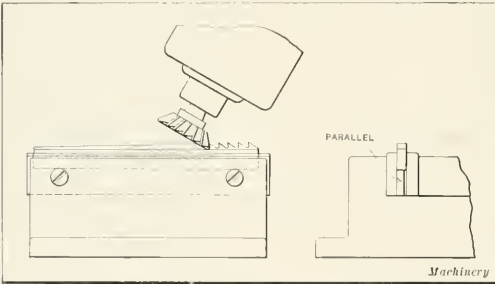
Milling a Broach with Vertical Attachment and Angular Cutter
